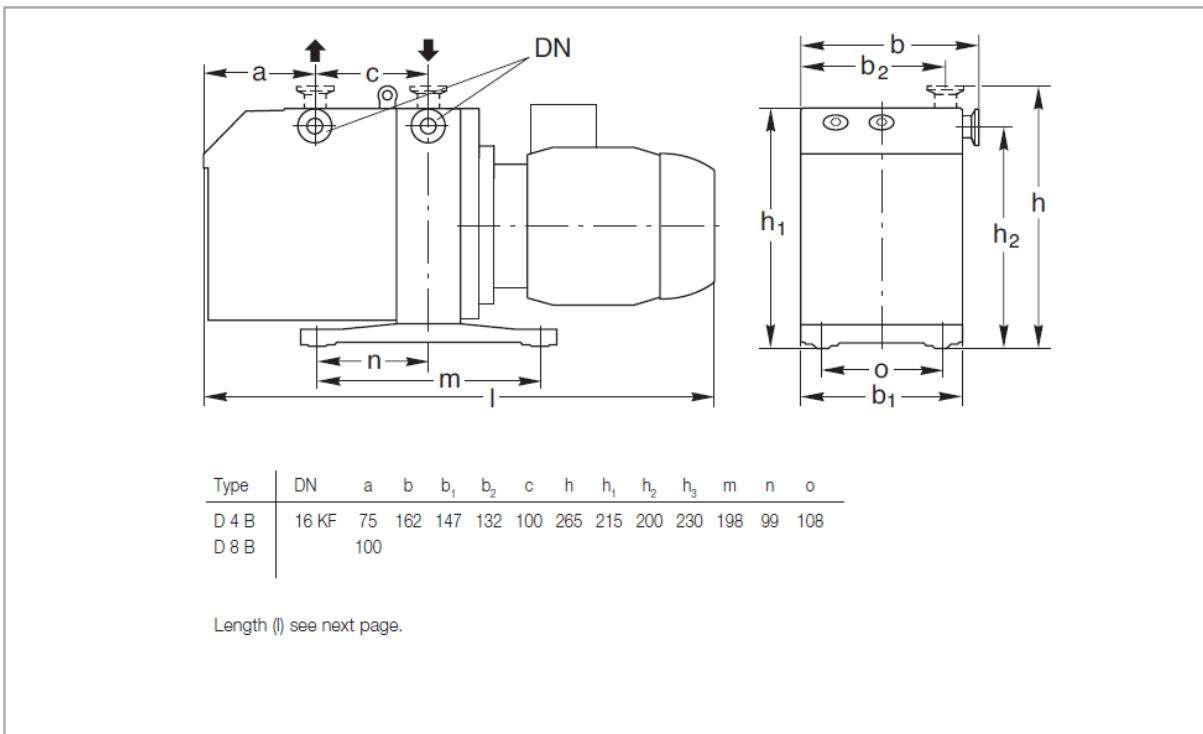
Dimensional drawings for the TRIVAC B pumps
